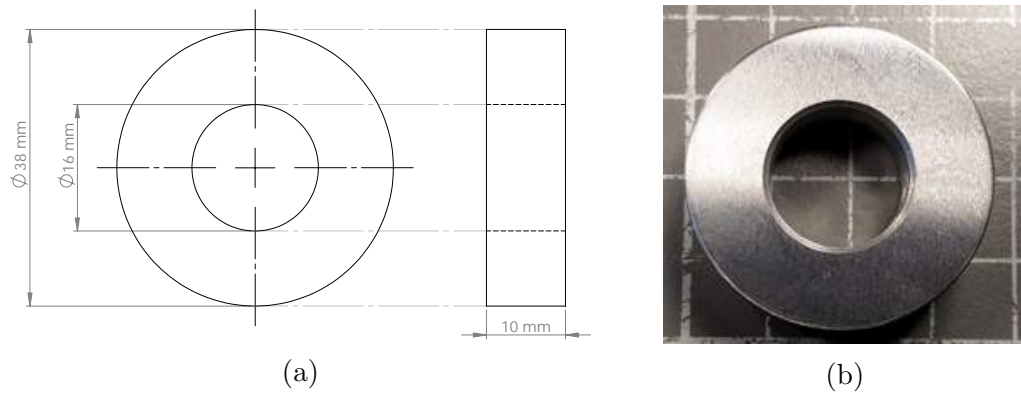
Steel wheel drawing (a); Steel wheel specimen (b).
